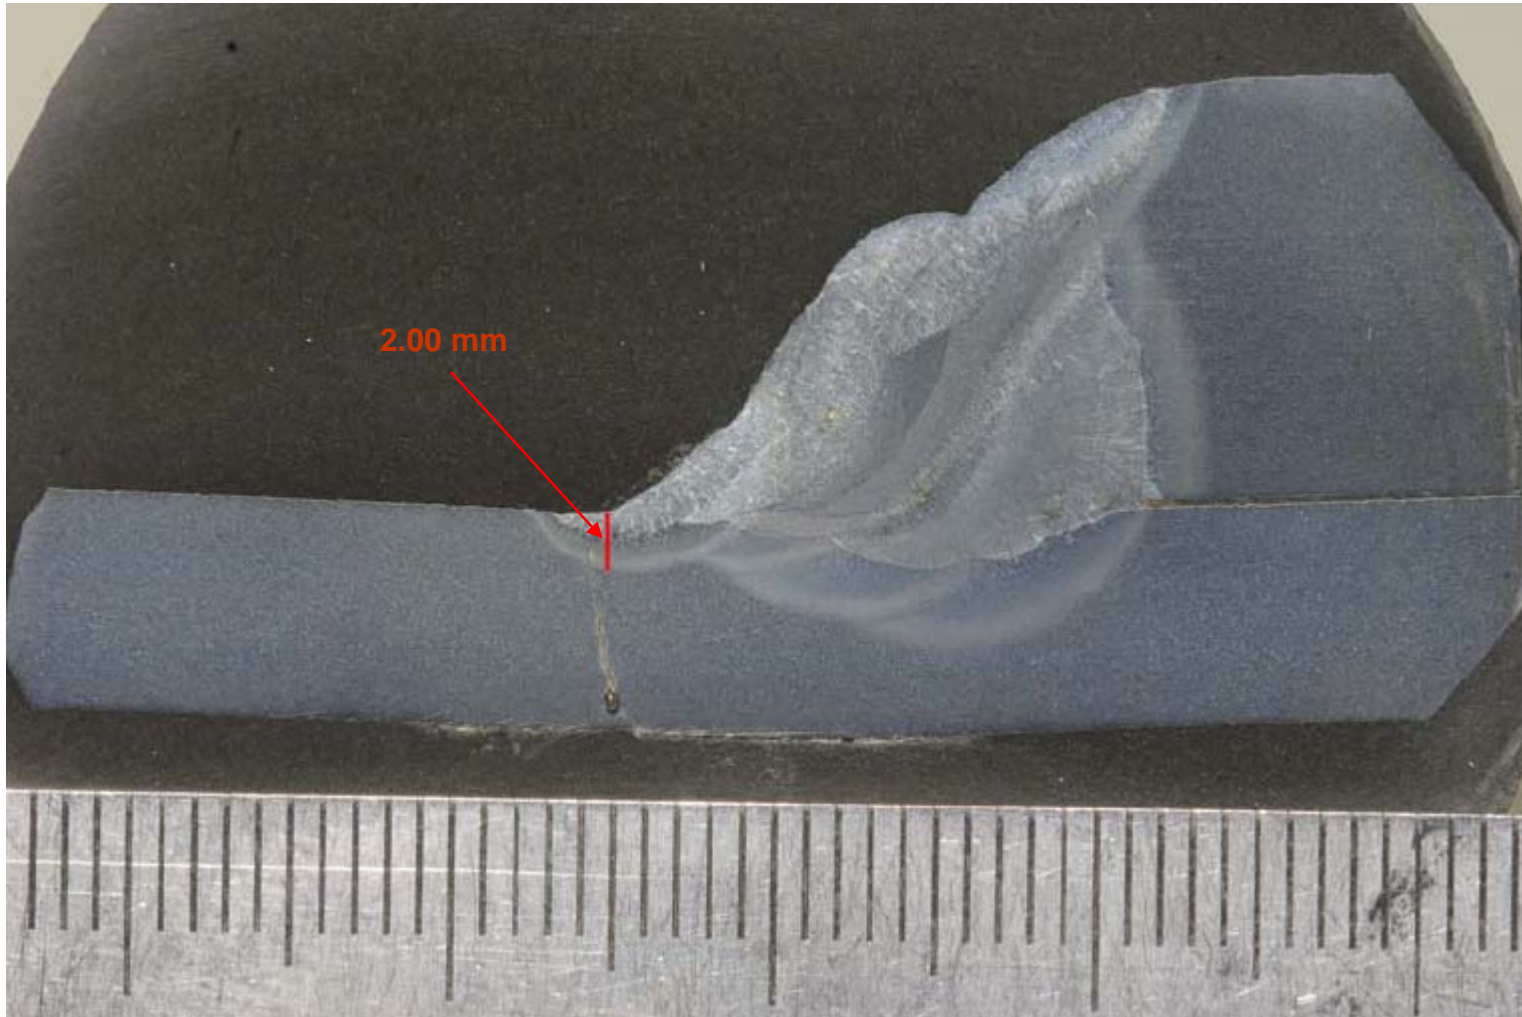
Fillet Weld Section and HAZ Depth at the 6:00 Position (Site of the Initiating Crack in the Pipeline Failure.)
